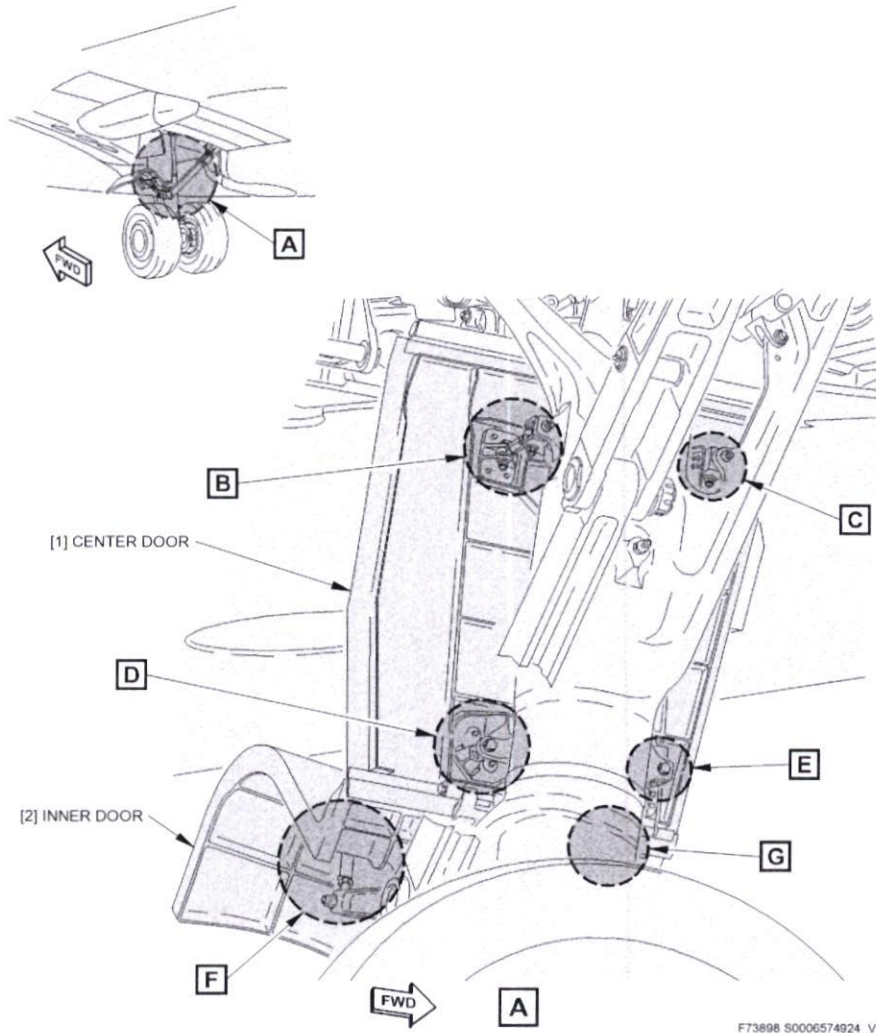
MLG Aft Trunnion Bearing Assembly Installation - Sheet 3
